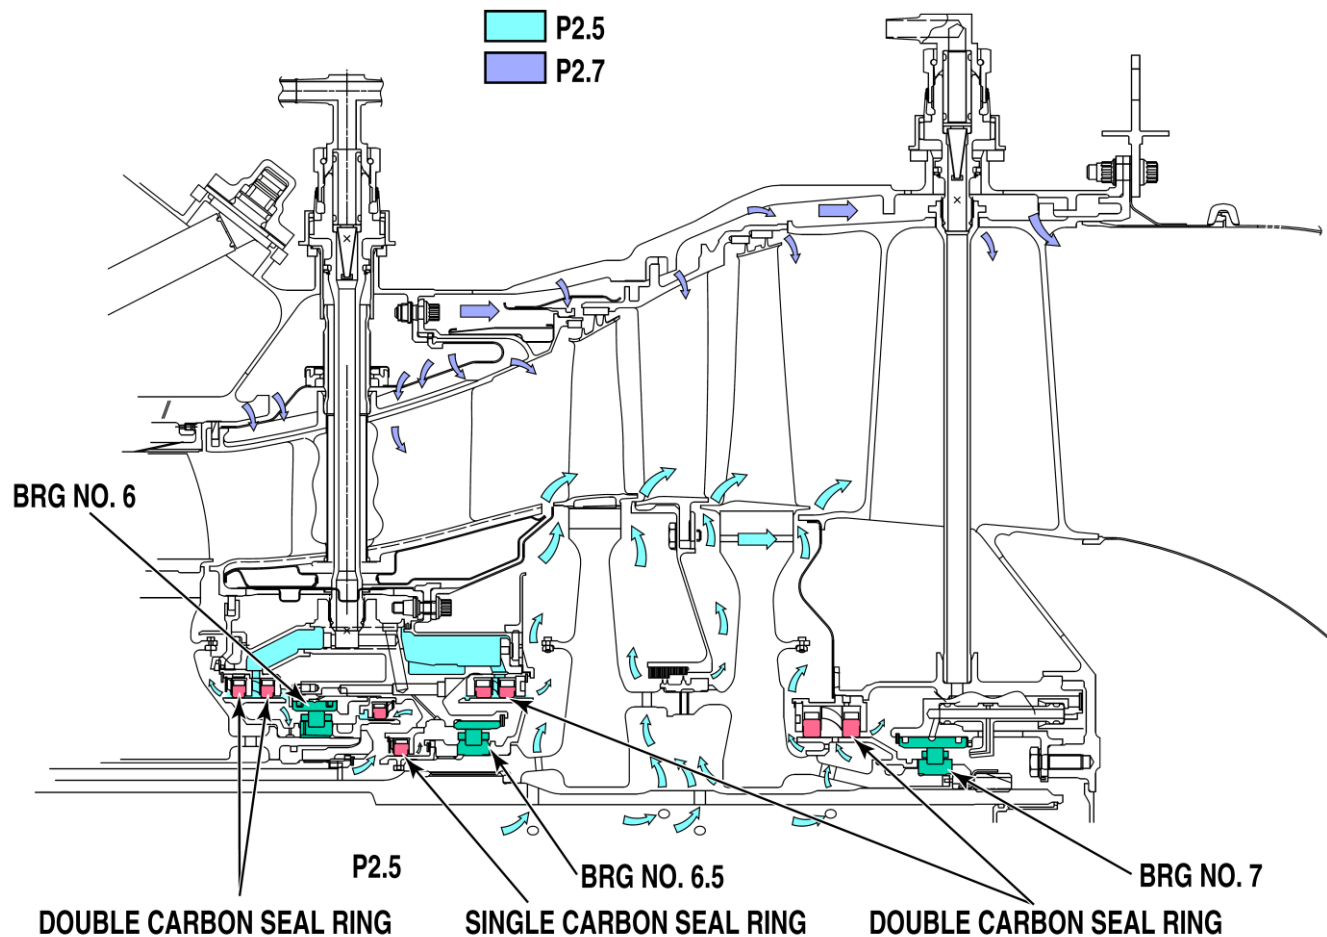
No. 6, 6.5 & 7 Bearing Cavity
